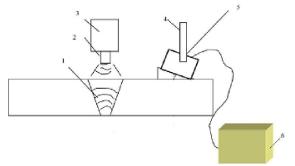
Scheme of ultrasonic influence on welded joint during welding process:
